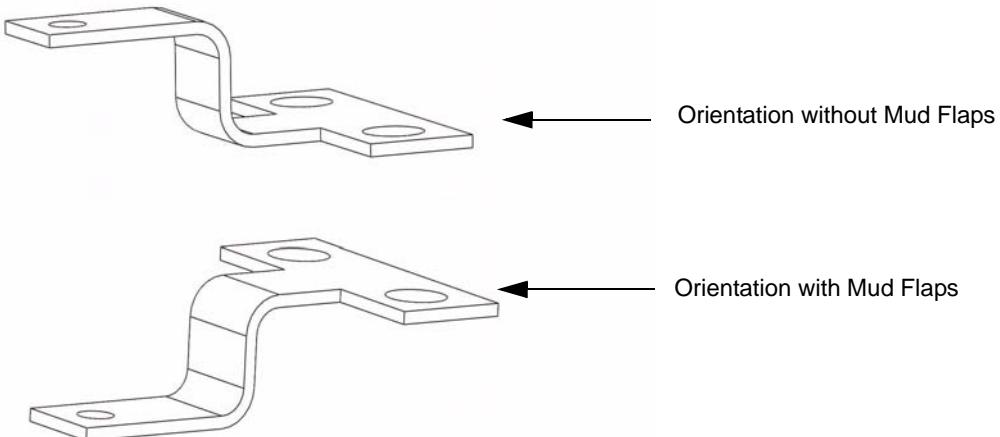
Wheel Angle Sensor Bracket Bolted
